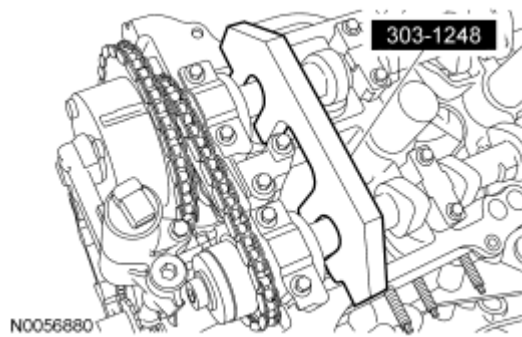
Installing Special Tool (303-1248) Onto Flats Of LH Camshafts
